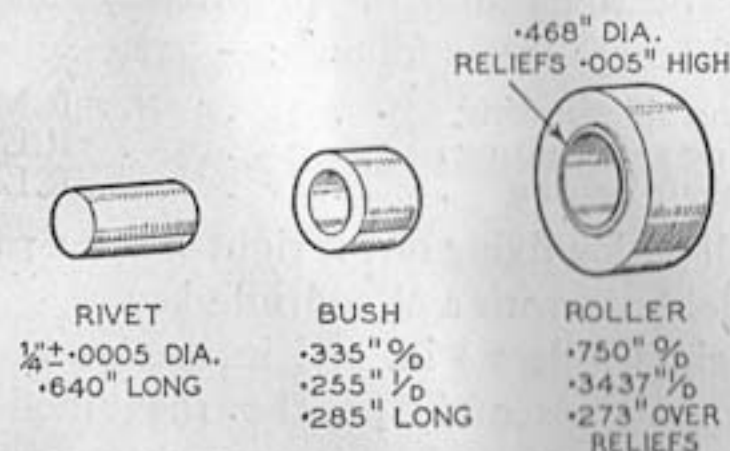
DETAILS OF ROLLER, RIVET AND BUSH TO REPLACE ROCKER PAD.
